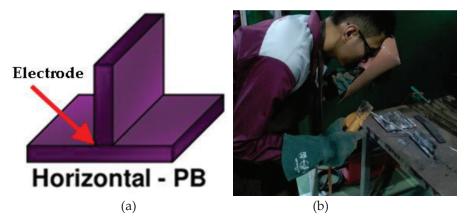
Horizontal welding position, PB (a) and awkward posture (b)
